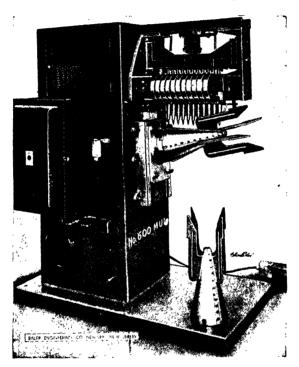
A large spot welder (Courtesy of: Eisler Engineering Co., Inc.)
